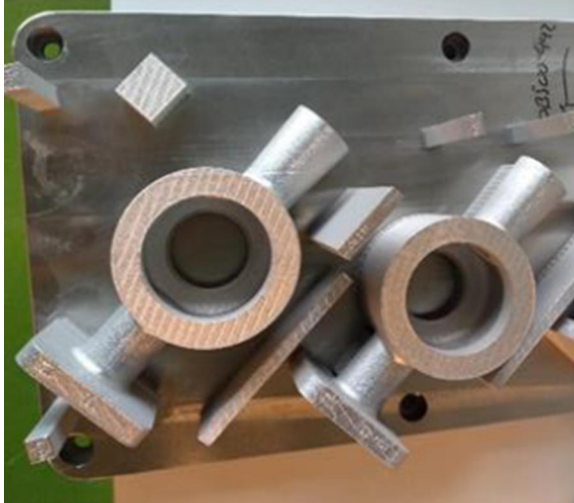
MANUFACTURED VALVE BODIES ON THE PRINTING PLATFORM
